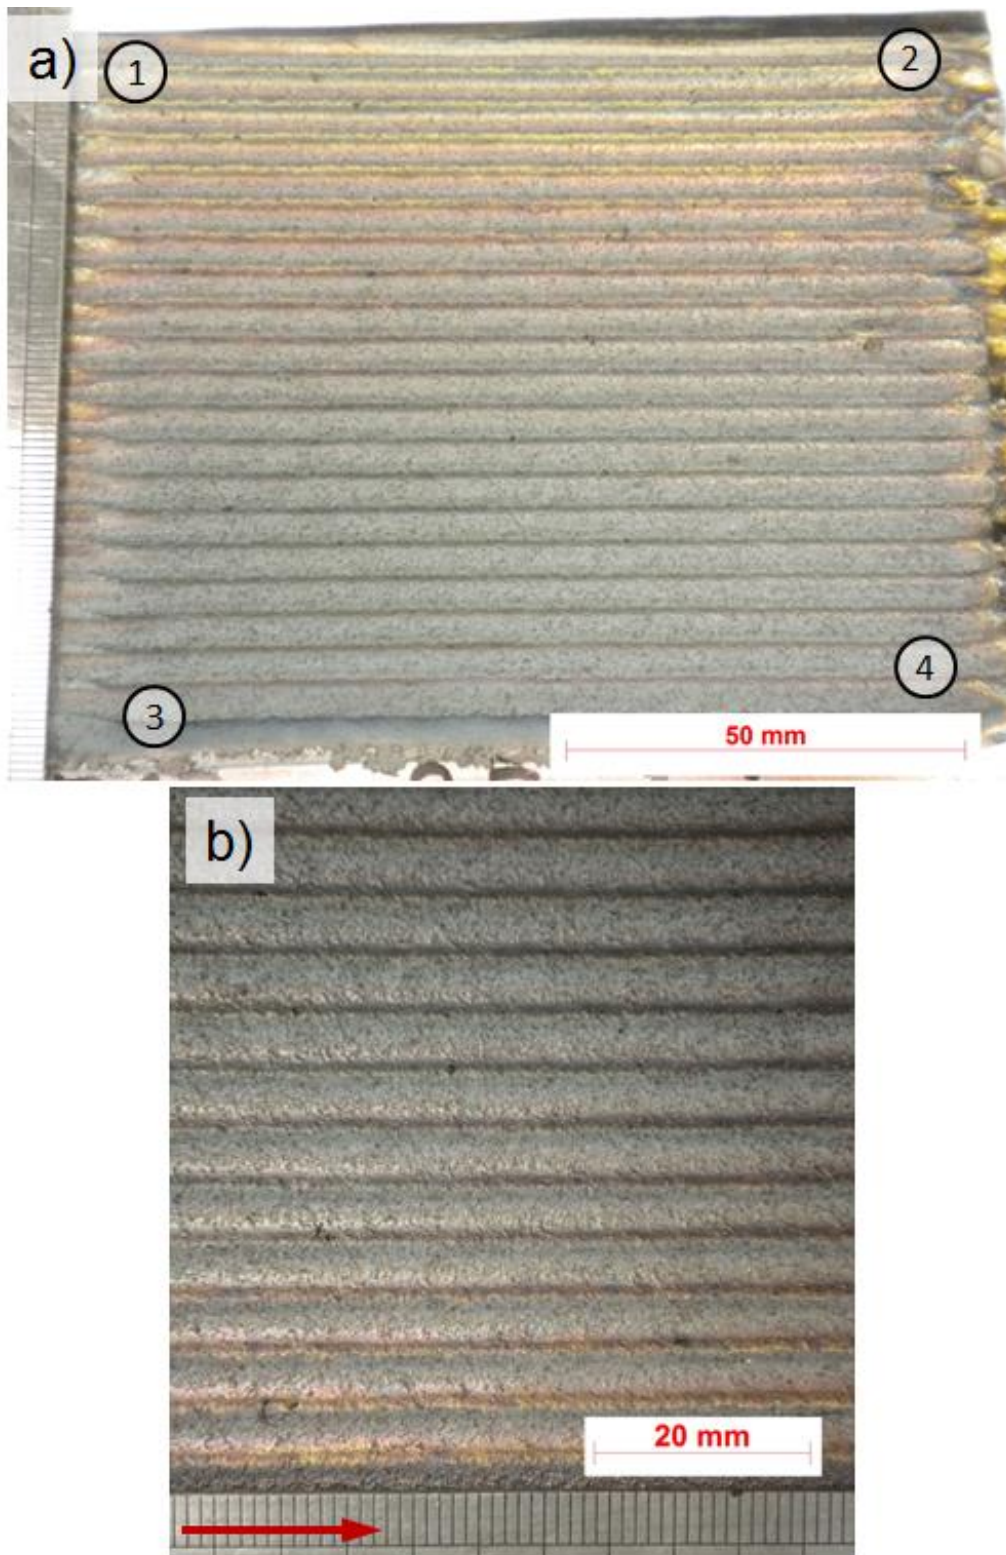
Cladding trial in overlap; a) PFR = 10 g/min; b) magnified image of a); 1: Beginning of first weld; 2: finish of first weld; 3: beginning of last weld; 4: finish of last weld; red arrow: welding direction
